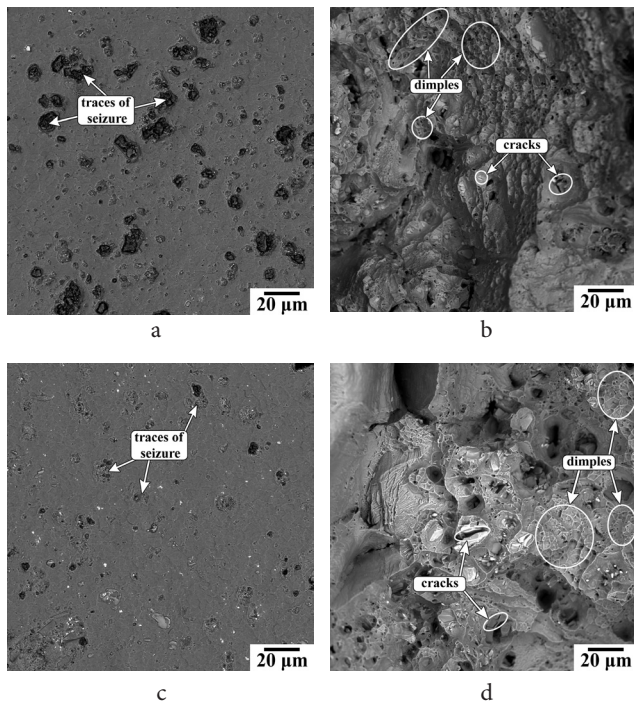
The fracture surfaces of bonded specimens after SSB (a, c) and SSB + HT (b, d): one piece of bonded specimens (a, b); another piece of bonded specimens (c, d).
